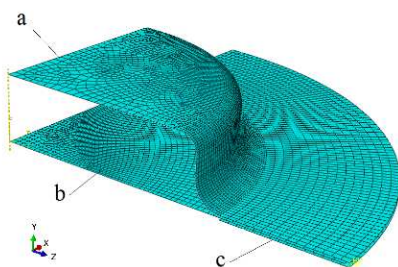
FEA Abaqus – Axisymmetric assembly model for $R = 6$ mm: a – die; b – blank; c – retaining ring.
